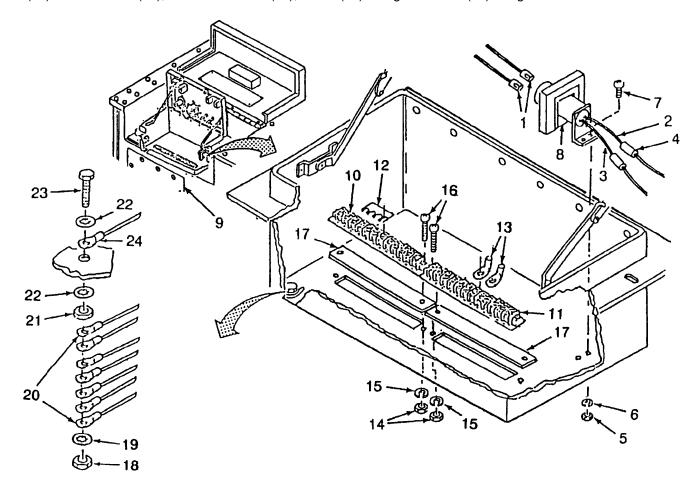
Control Box Disassembly, Transformer/Terminal Boards
